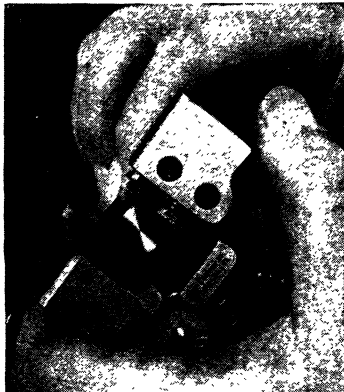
Snap gaging a small cylindrical part. (Courtesy of U.S. Office of Education.)
